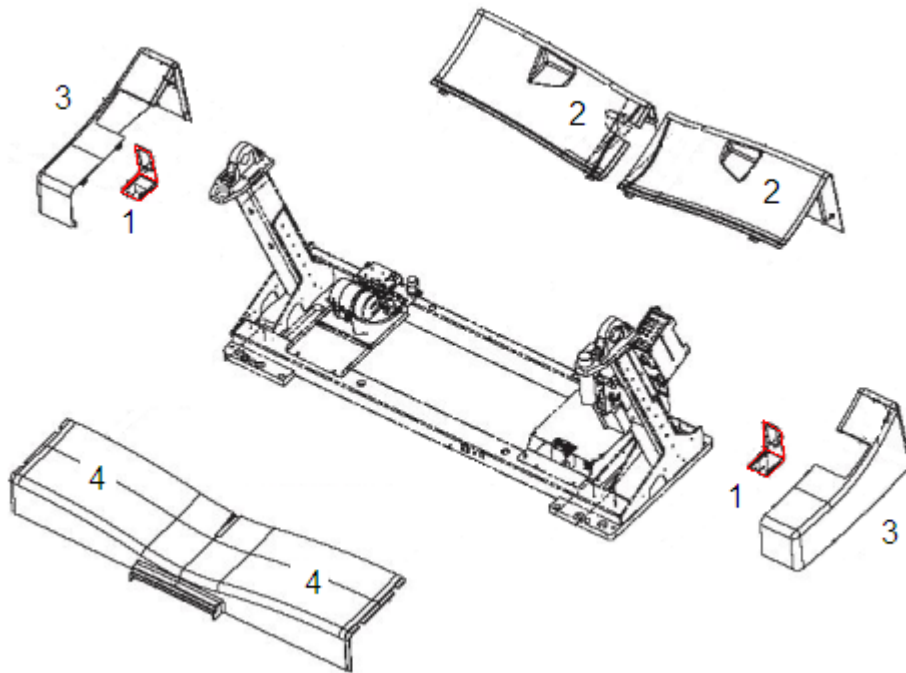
GANTRY BASE COVERS, EXPLODED VIEW
